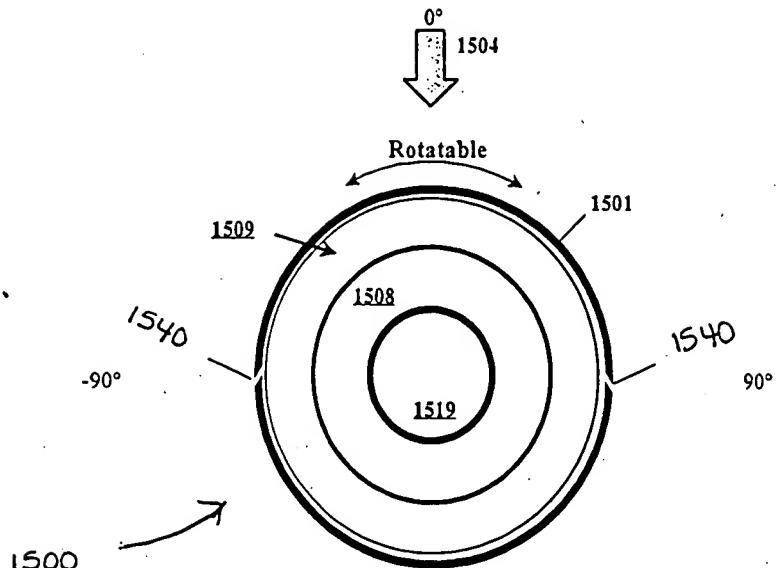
C Drilling Riser BLC, Telescoping Sheath Section
